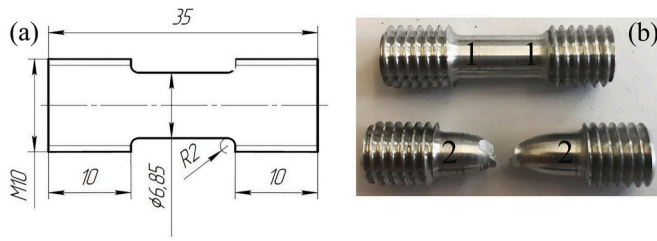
(a) Schematic diagram and (b) photograph of the tensile test specimen, with dimensions in millimeters. In (b), 1 represents the specimen before the tensile test, while 2 represents the specimen after the tensile test, showing deformation and fracture characteristics.
